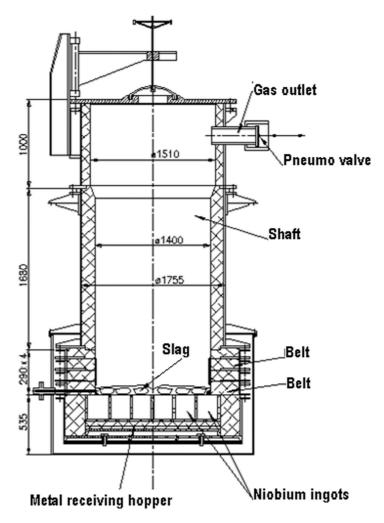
Melting shaft furnace for rare metals and master alloys manufacture.
